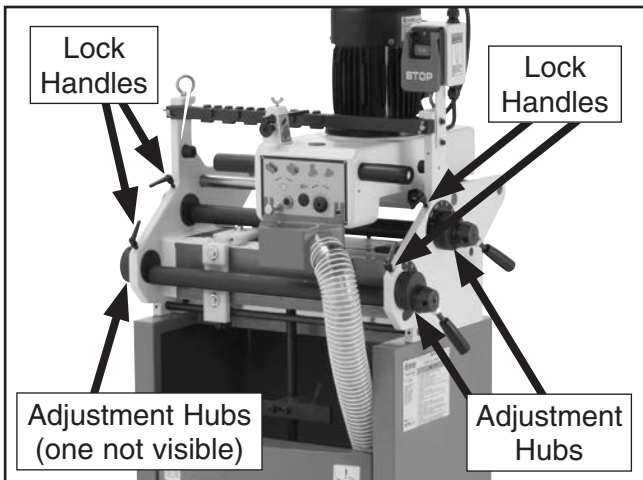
Lock handles and adjustment hubs for adjusting bar clamp clamping thicknesses.
